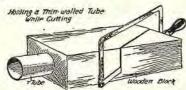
Method of sawing through tubing. Consists of a wooden block with a drilled hole to receive the tube.
